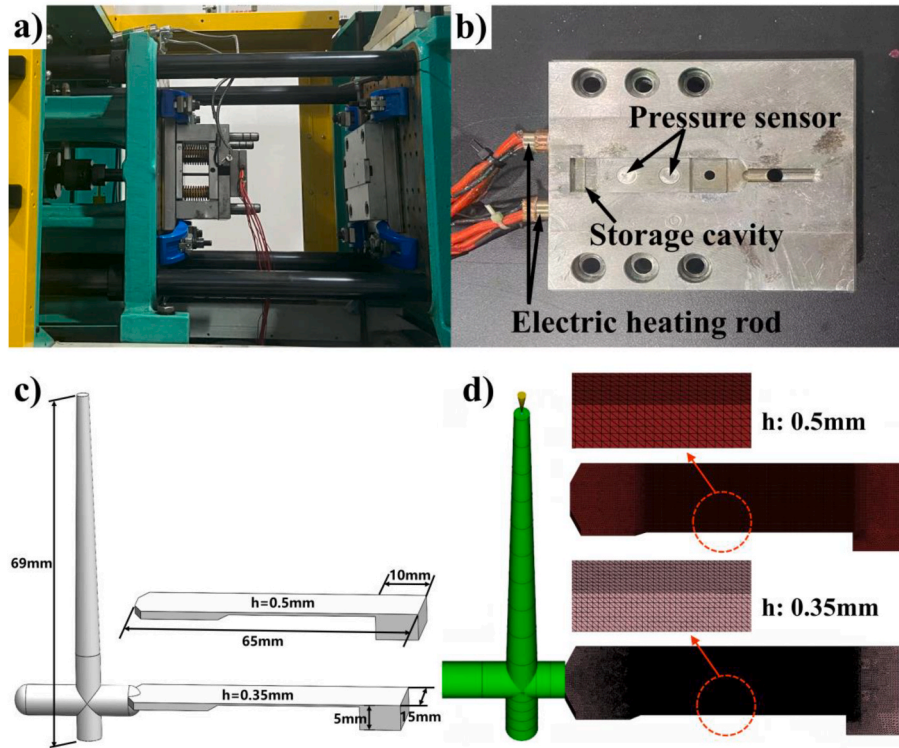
Micro injection molding test mold. a) mold, b) mold core, c) 3D model of the manufactured part, d) simulation model in Moldflow.
